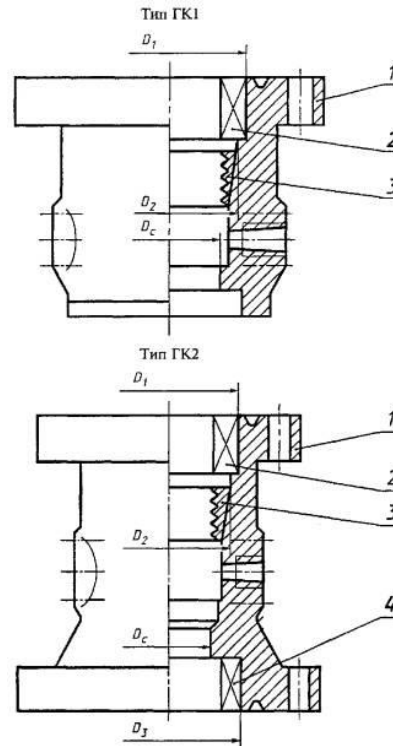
Schematic illustration of the casing head: 1 – body; 2 – primary seal ; 3 – casing hanger ; 4 – secondary seal.
